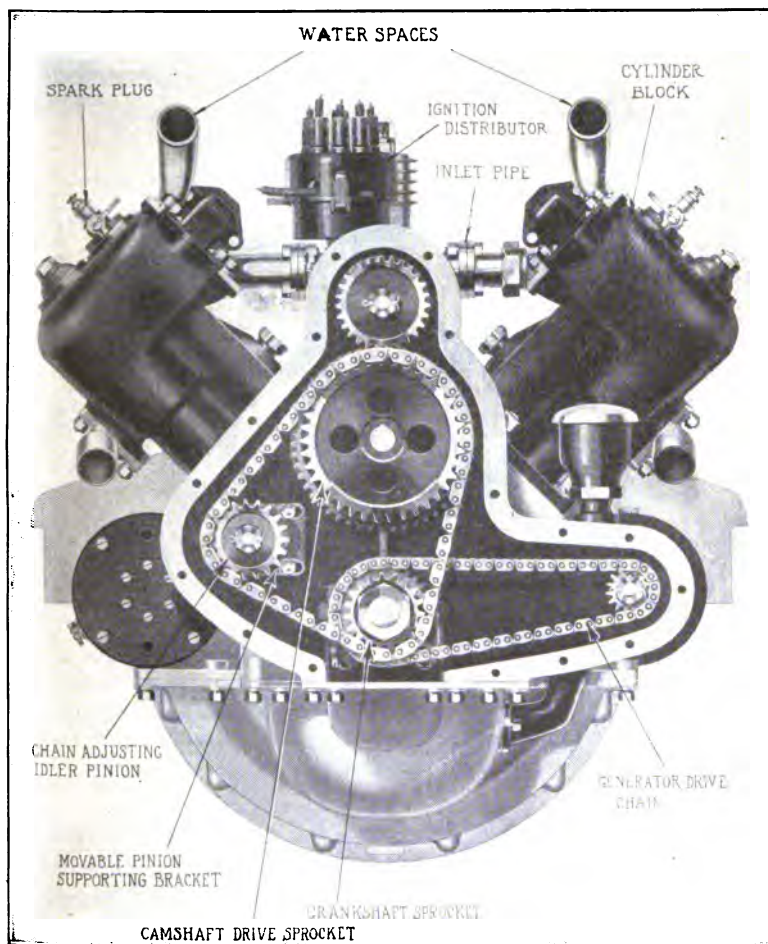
Front View of King Eight Cylinder Power Plant Showing Silent Chain Drive to Generator.
